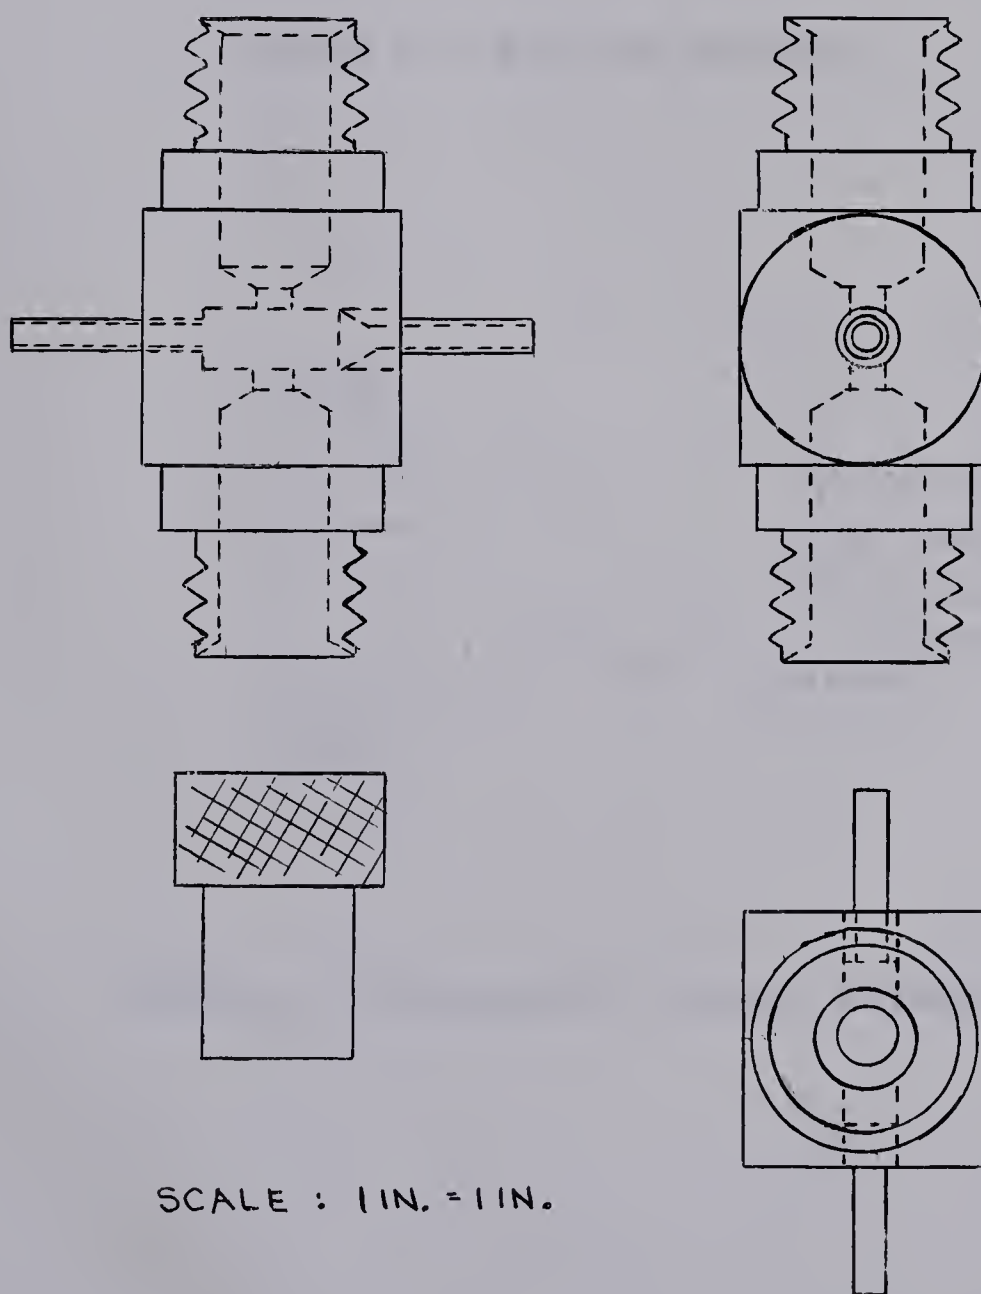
FLOW TUBE SUB-ASSEMBLY
